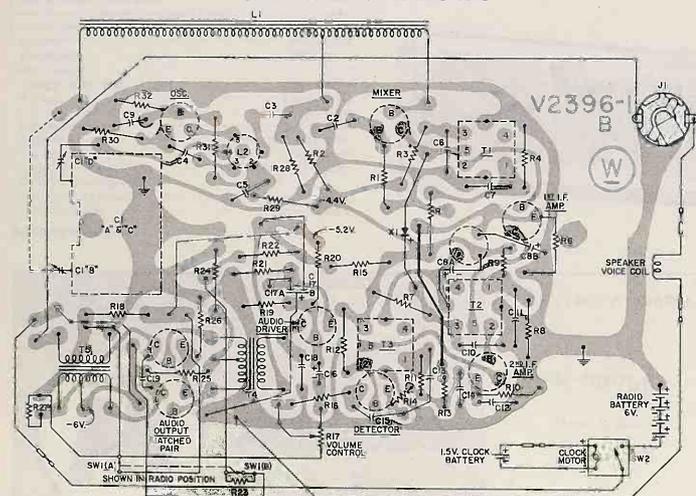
Bottom view of printed circuit board with components shown symbolically.
